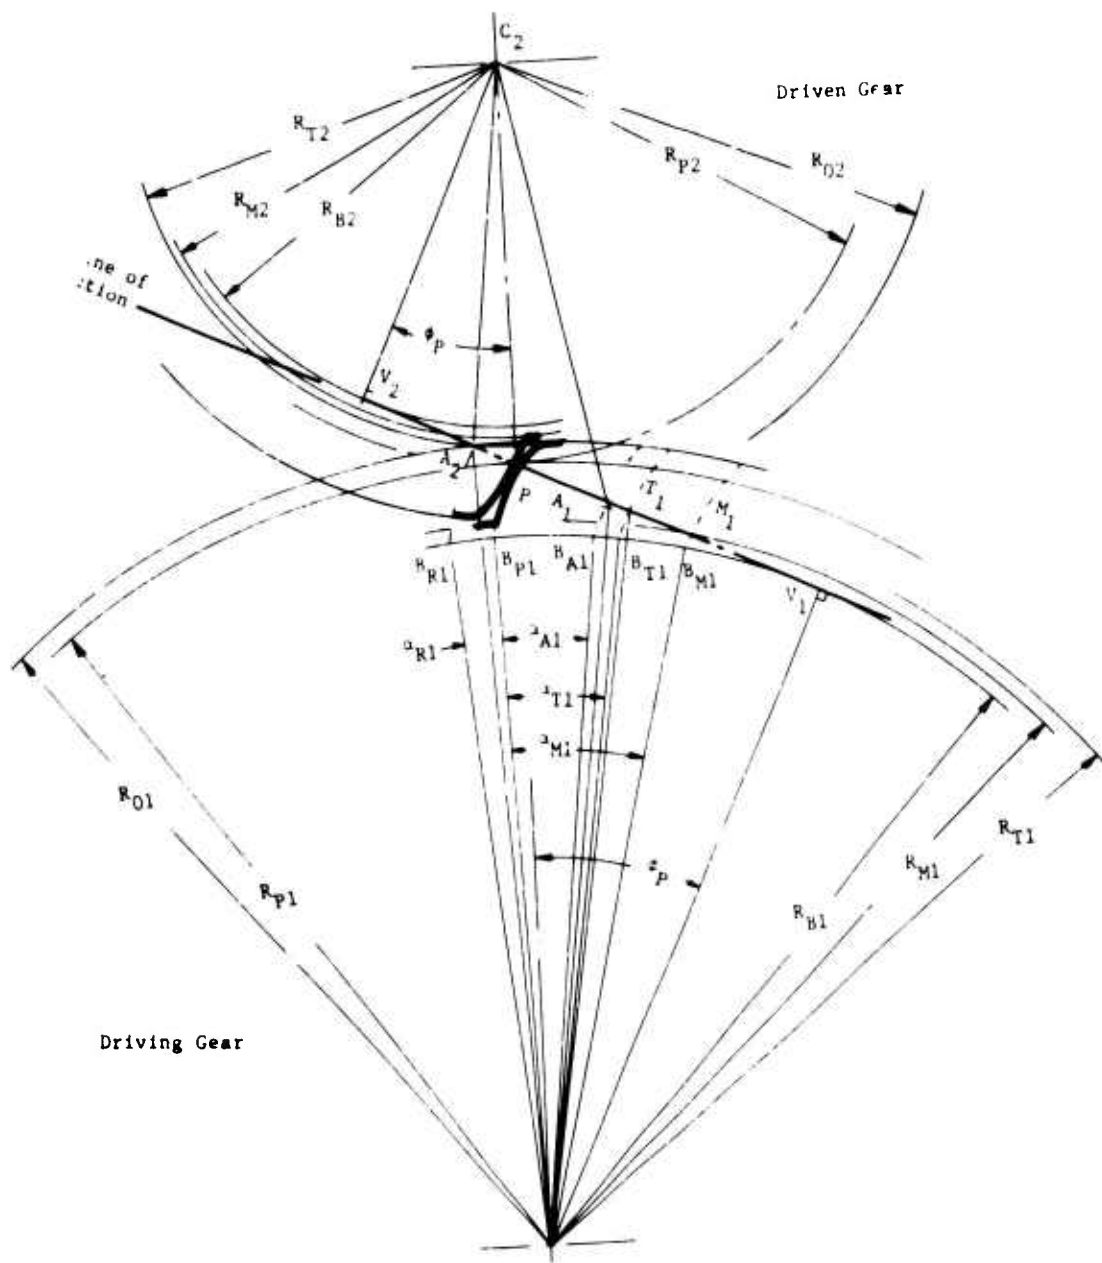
External Gear Tooth Driving External Gear Tooth.
